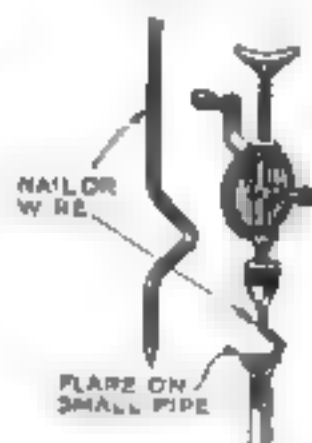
A bent finishing nail, used in a hand drill, makes useful tool for flaring a pipe end.
